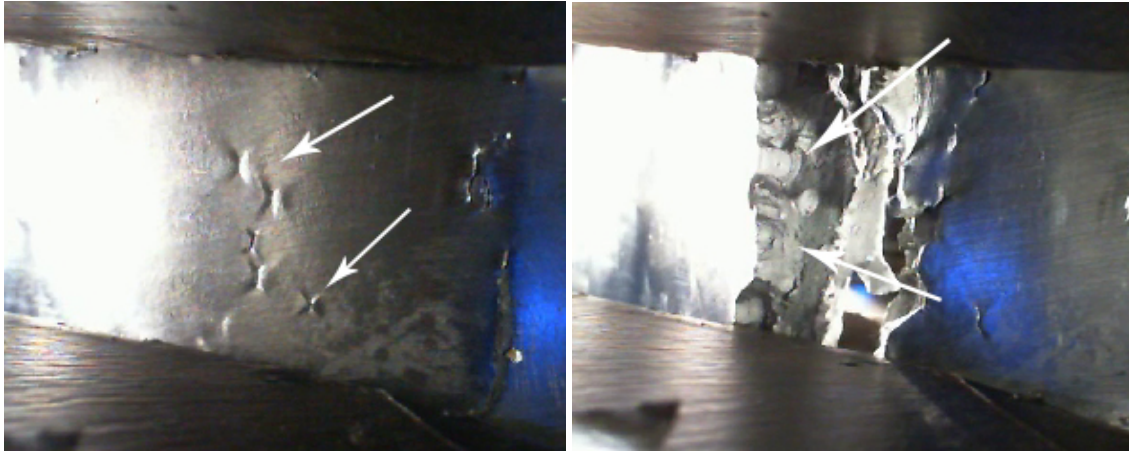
Subsurface-origin fatigue fractures on a welded bend coupon.
